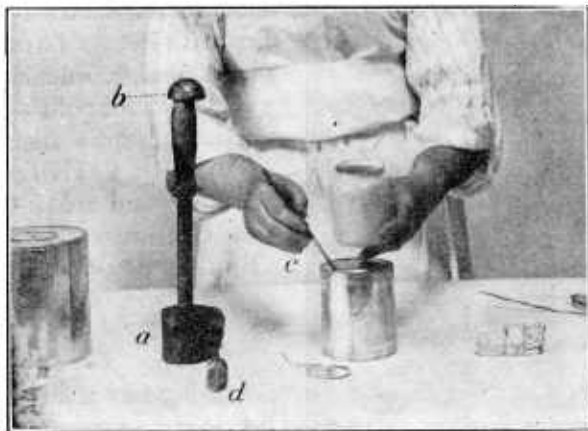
Applying the flux, the first step in soldering tin cans: *a*, Capping iron; *b*, head of inner upright steel; *c*, proper position of brush while stroking rim of cap with flux; *d*, tipping copper or soldering iron.
